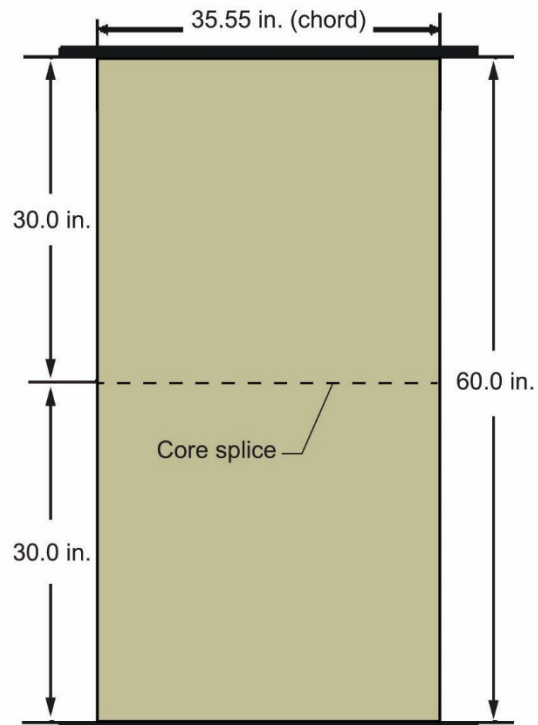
Potted specimen dimensions. Note that outside surfaces of aluminum end plates were machined flat and parallel. Position of core splice is also shown relative to inside surface of aluminum end plates.
